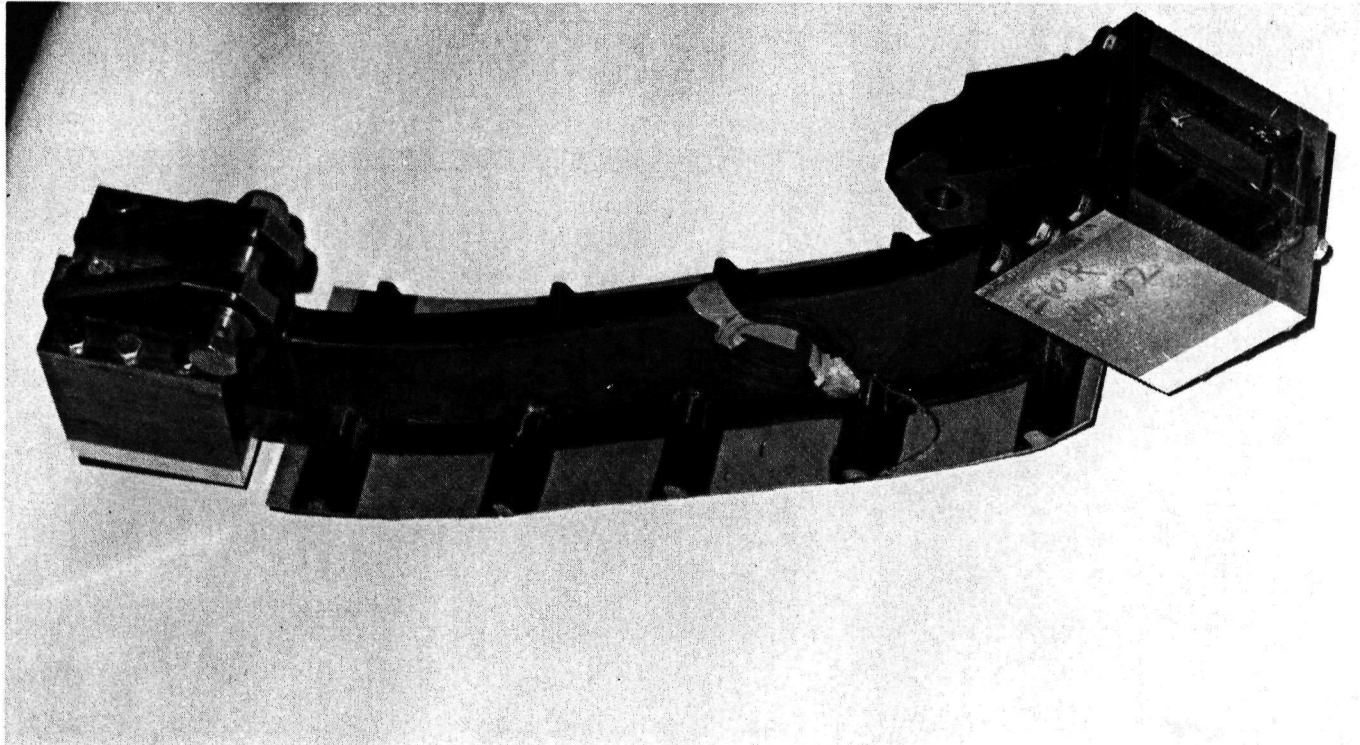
FRAME FATIGUE SPECIMEN WITH TEST END FITTING INSTALLED.
